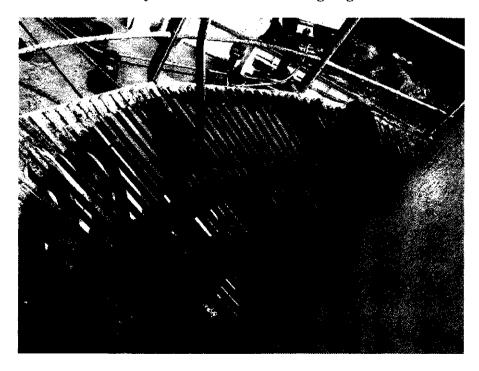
, Segment of fractured slewing ring and some nuts, washers, roller bearings and spacers on the crane tower platform
